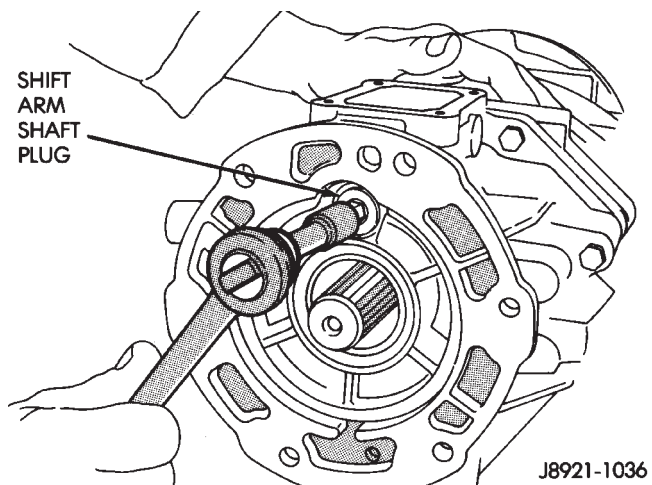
Removing/Installing Shift Lever Shaft Plug
